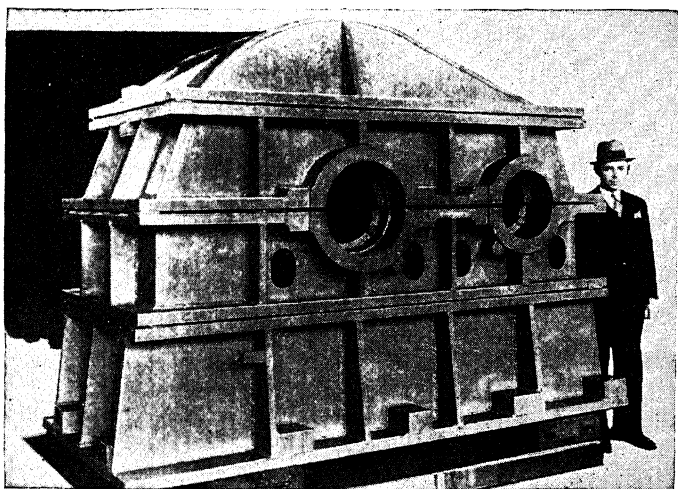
Gear housing for a rolling-mill drive, all parts of which are cut by machine gas-cutting. It is completely assembled by welding. (*Lukens Steel Co.*)
